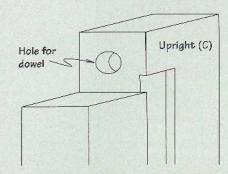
Bore the hole in the upright which will receive the dowel that connects the frame to the upright.
